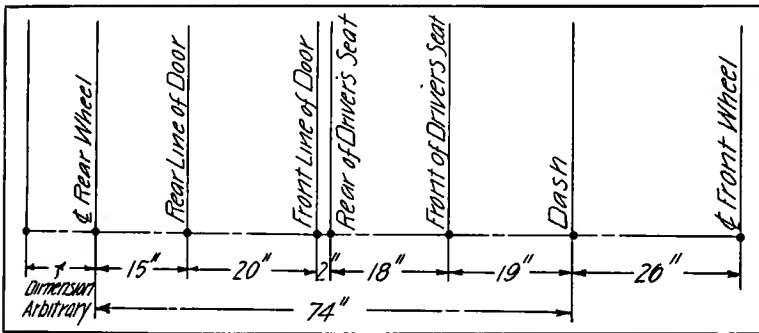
Showing a permissible wheelbase of 100 inches in the layout of a cab chassis.
